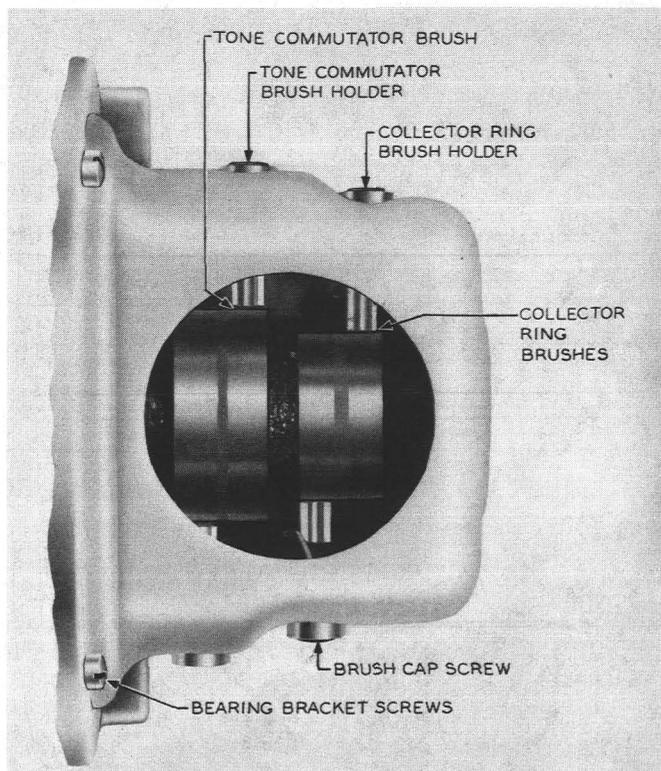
Collector Ring End (Electric Specialty Co. KS-5319-04)
